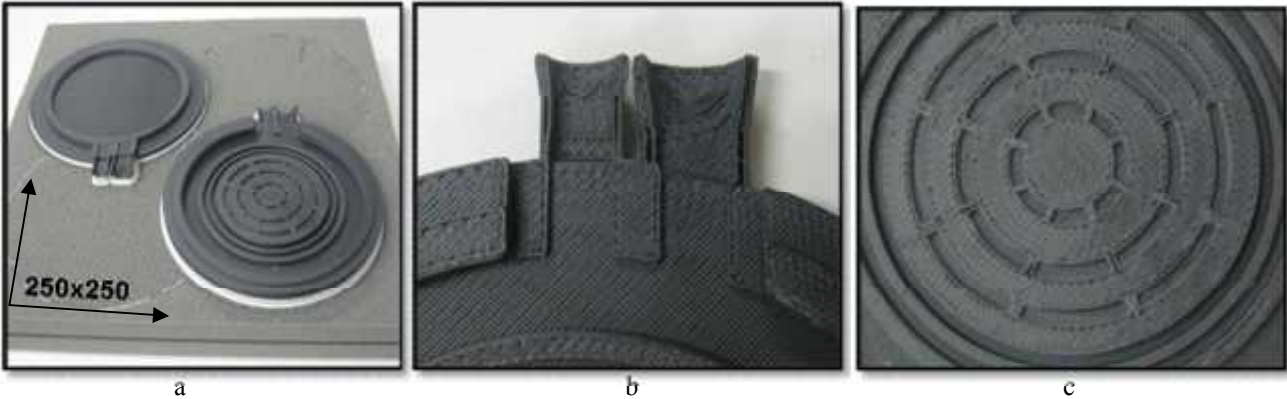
a) Upper VSD insert mould prototype No 2 on fabrication platform; b) Modifying the injection channels and the separation plane; c) Adding the liquid drainage channels.
